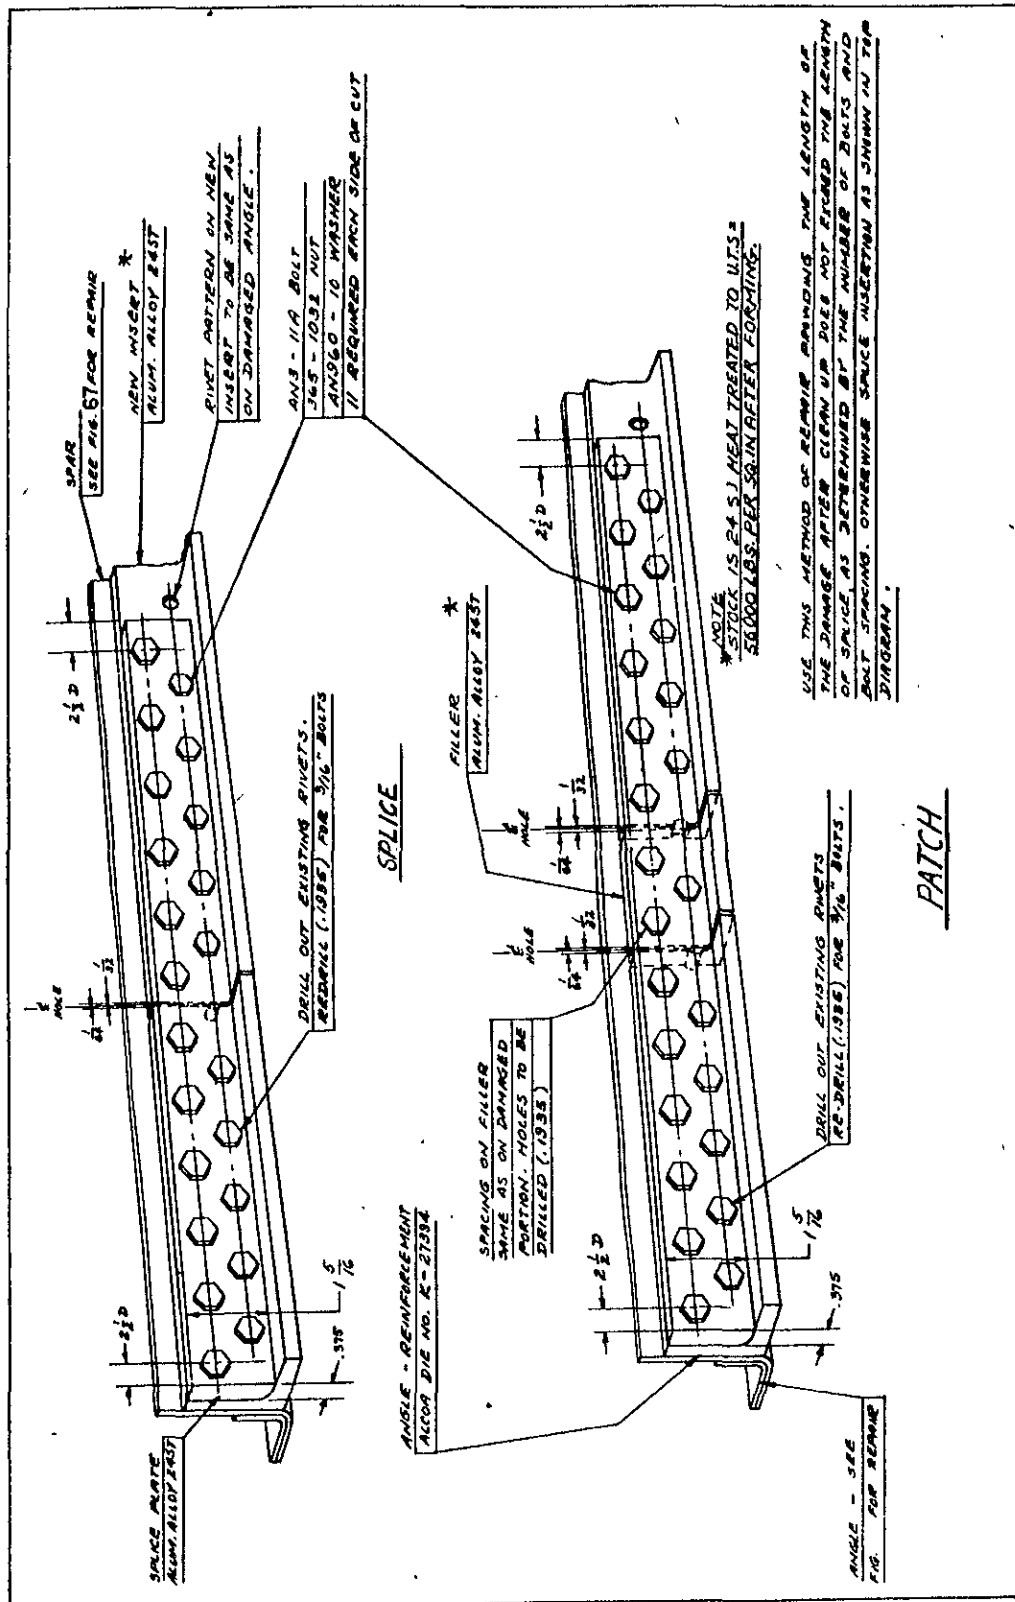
Spar No. 5 - Lower Surface - Angle - Reinforcement Splice
